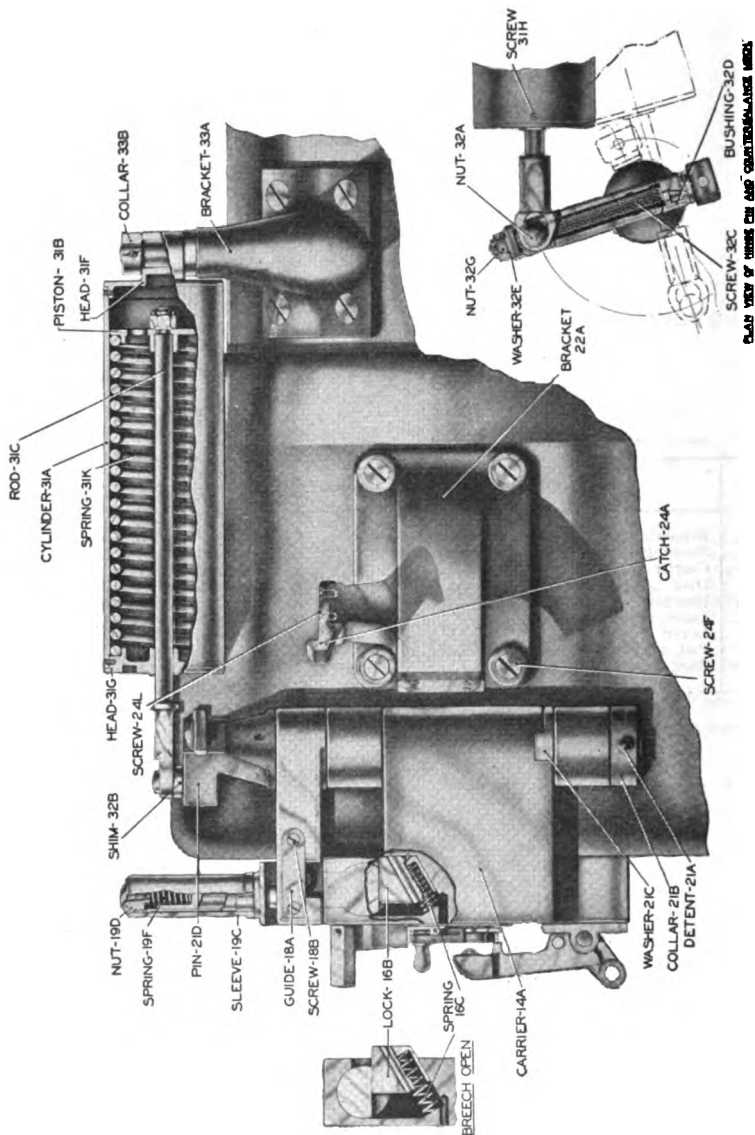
Breech mechanism and counterbalance cylinder—*assembled and sectioned views
